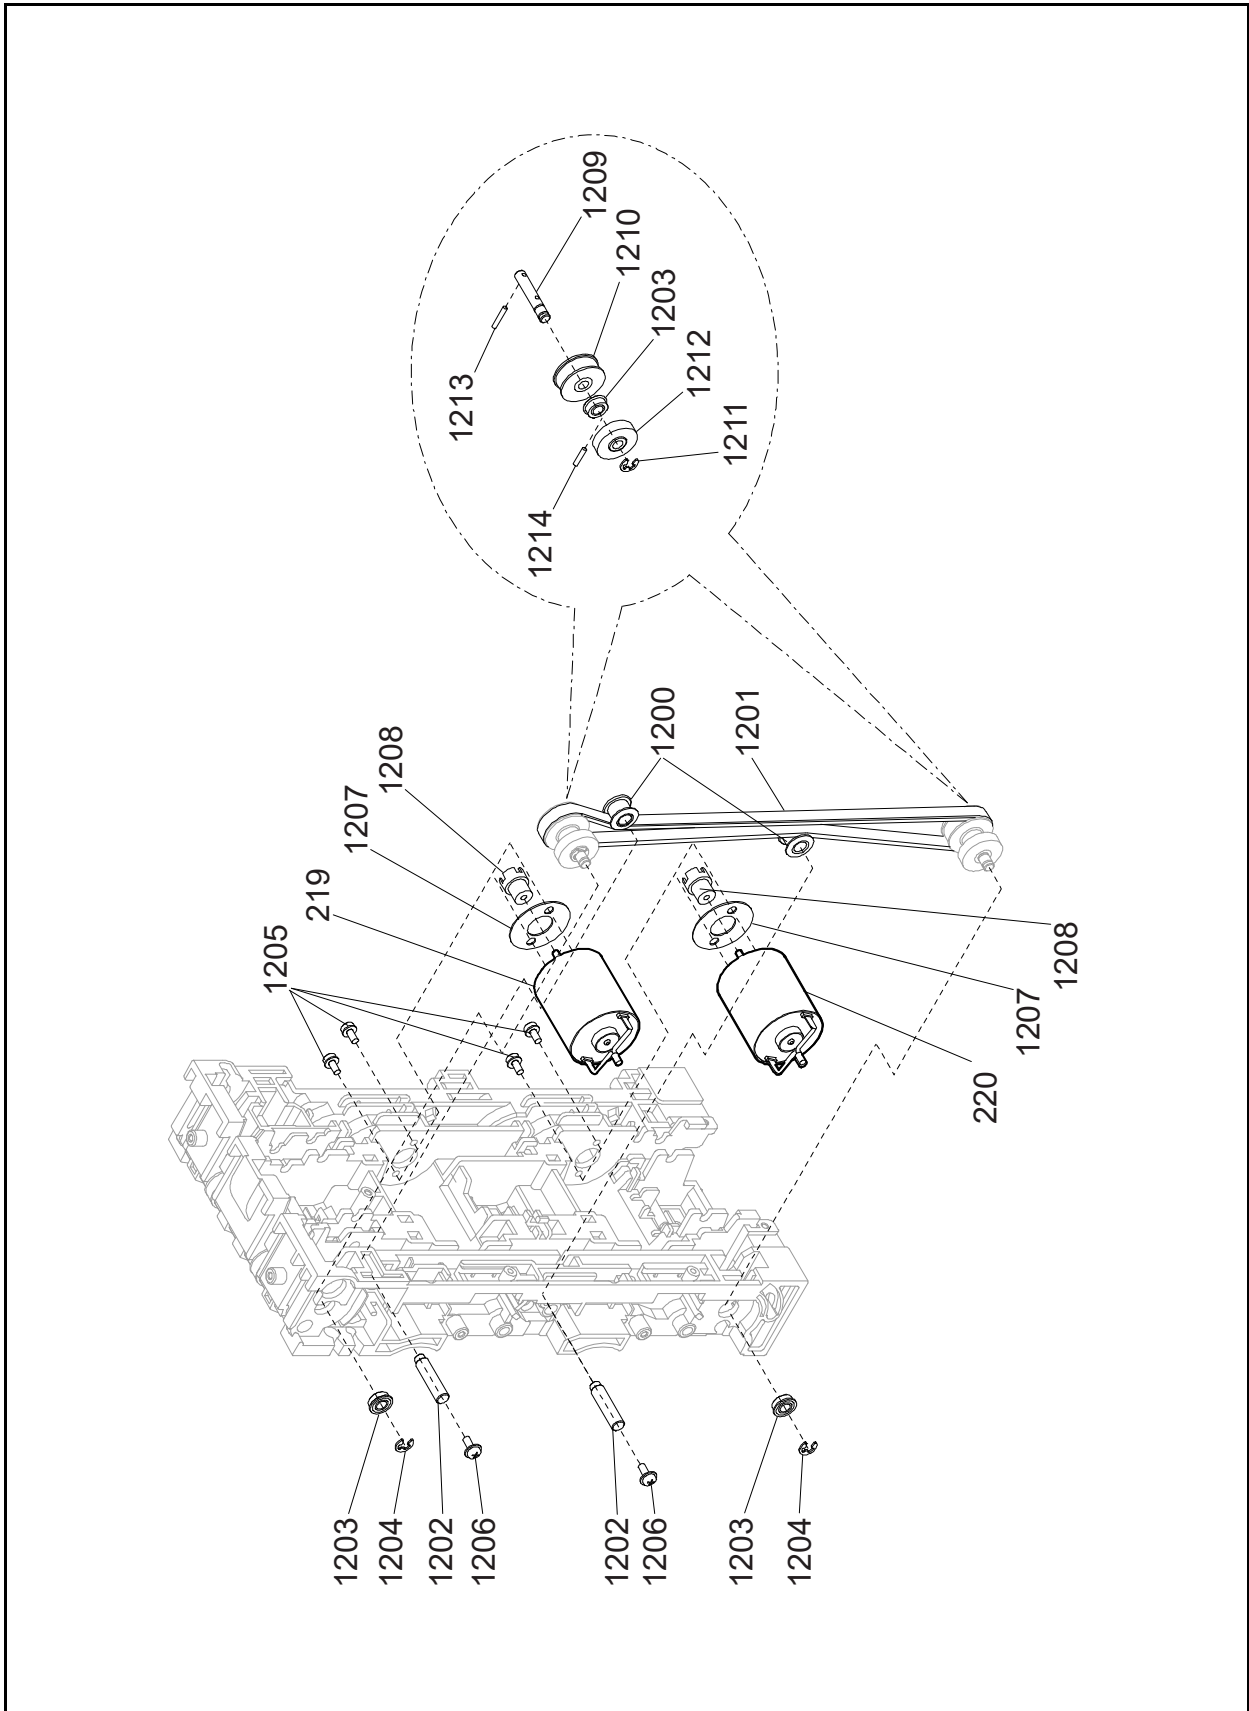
iPRO-RC Rear Transport Assembly 2 Exploded View
